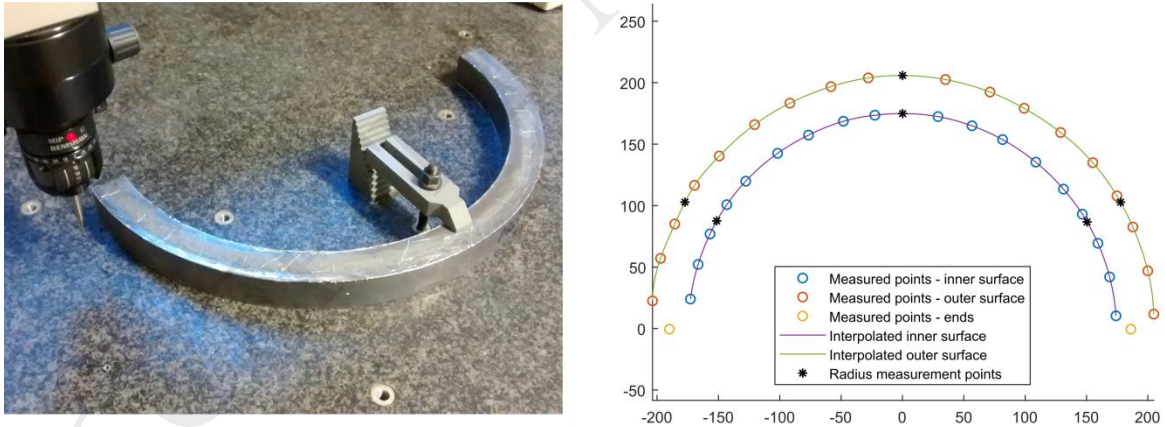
a. CMM machine b. Example shape outline and radius measurement points
